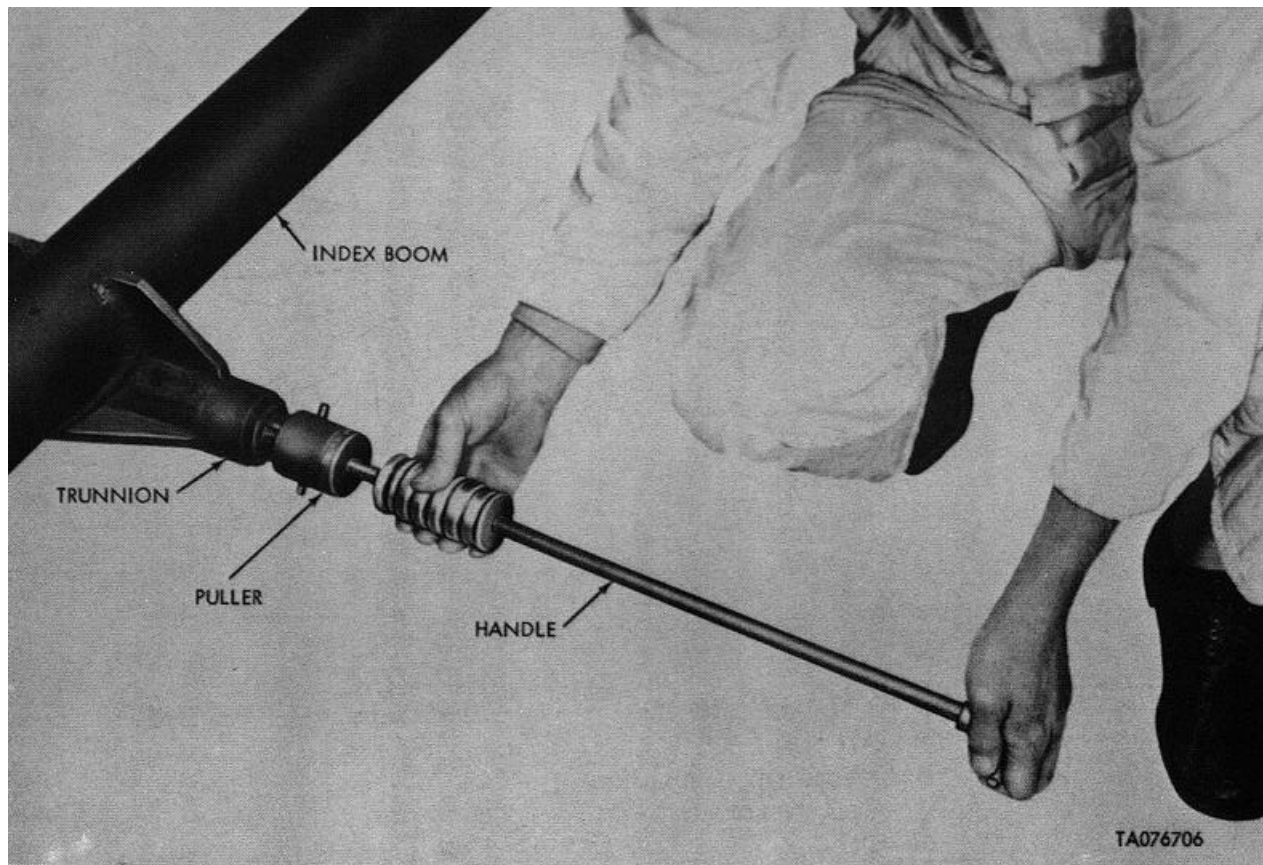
Index Boom - Pin and Bushing Removal Using Puller with Handle
